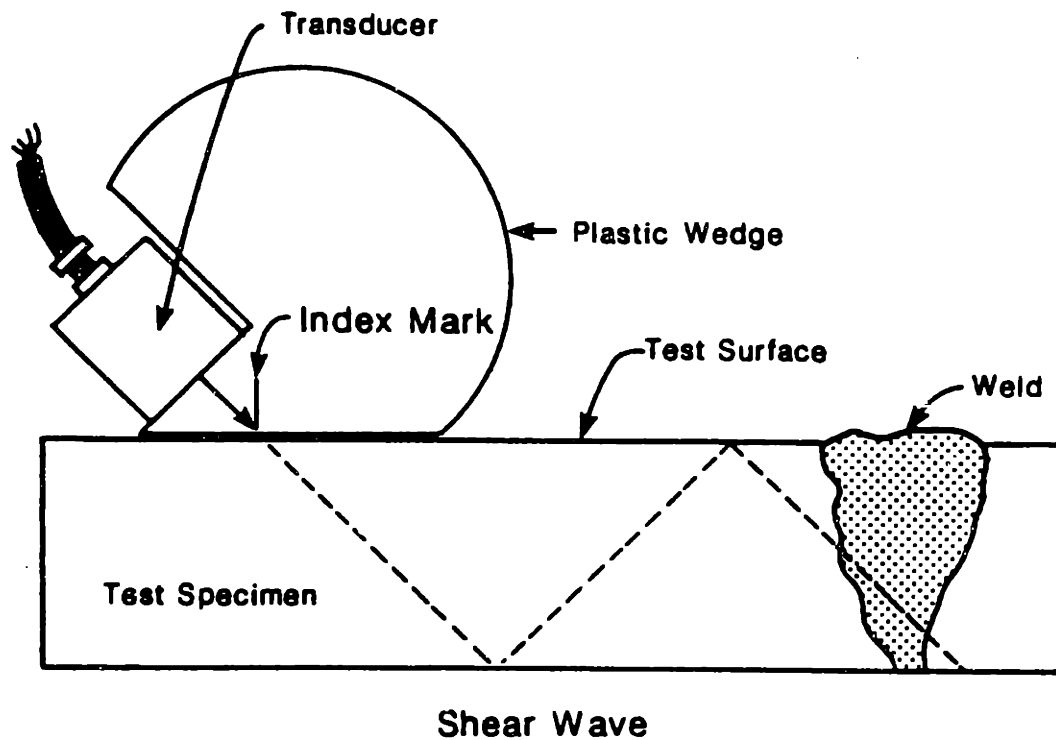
Welded inspection using an angle-beam probe. (FHWA, 1986)
